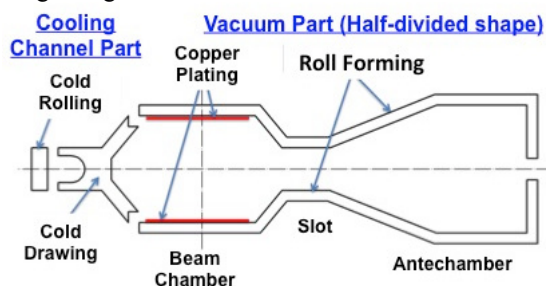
Vacuum chamber components, all of which are connected using laser beam welding.
